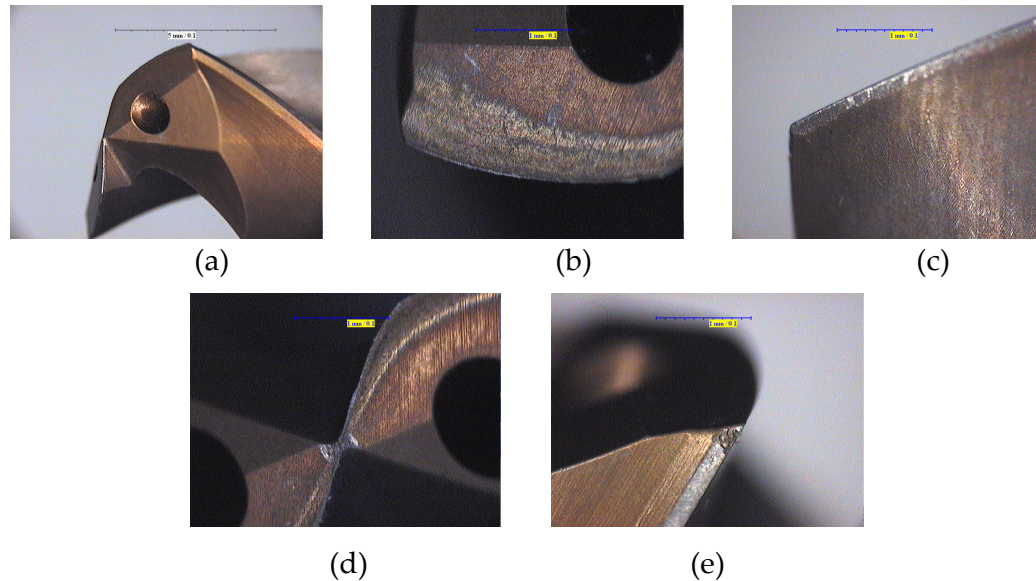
Tool Wear in Drilling of Ti-6Al-4V (S=1400 rpm, f=119 mm/min) (a) Overall (b) Flank Wear (c) Crater Wear (d) Chisel Wear (e) Margin Wear
